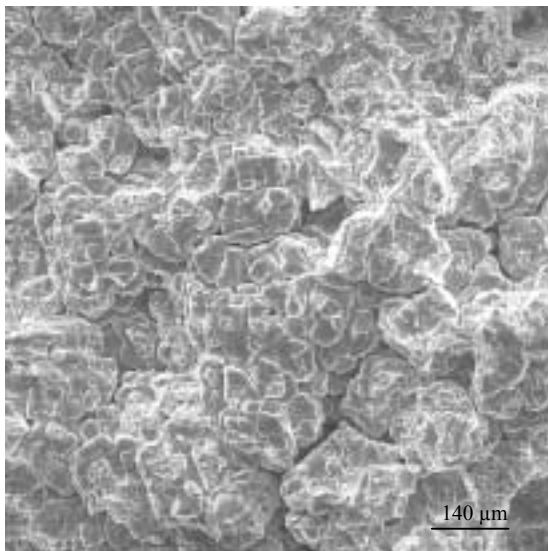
Large oxide films found on the fracture surface of the sample machined from the sprue.
